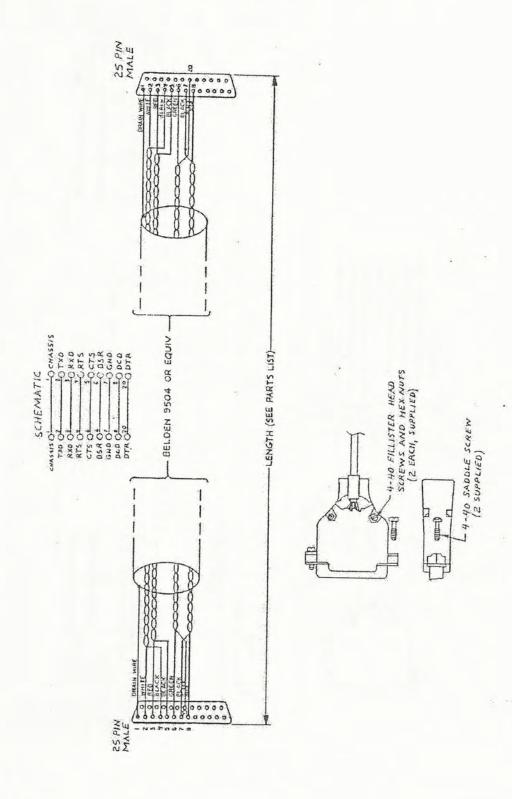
25M-25M Modem Cable 4x20 Assembly 24C1165 Rev A
